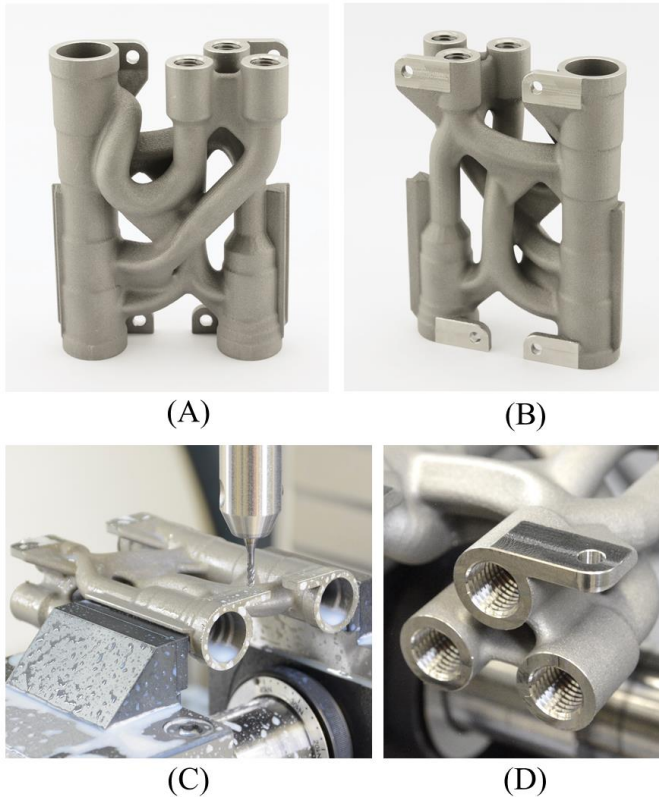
(A) Front view of design variant V7 fabricated in stainless steel using L-PBF; (B) Rear view of part; (C) Part clamped for machining; (D) Detailed view of machined interfaces and thread connections.
